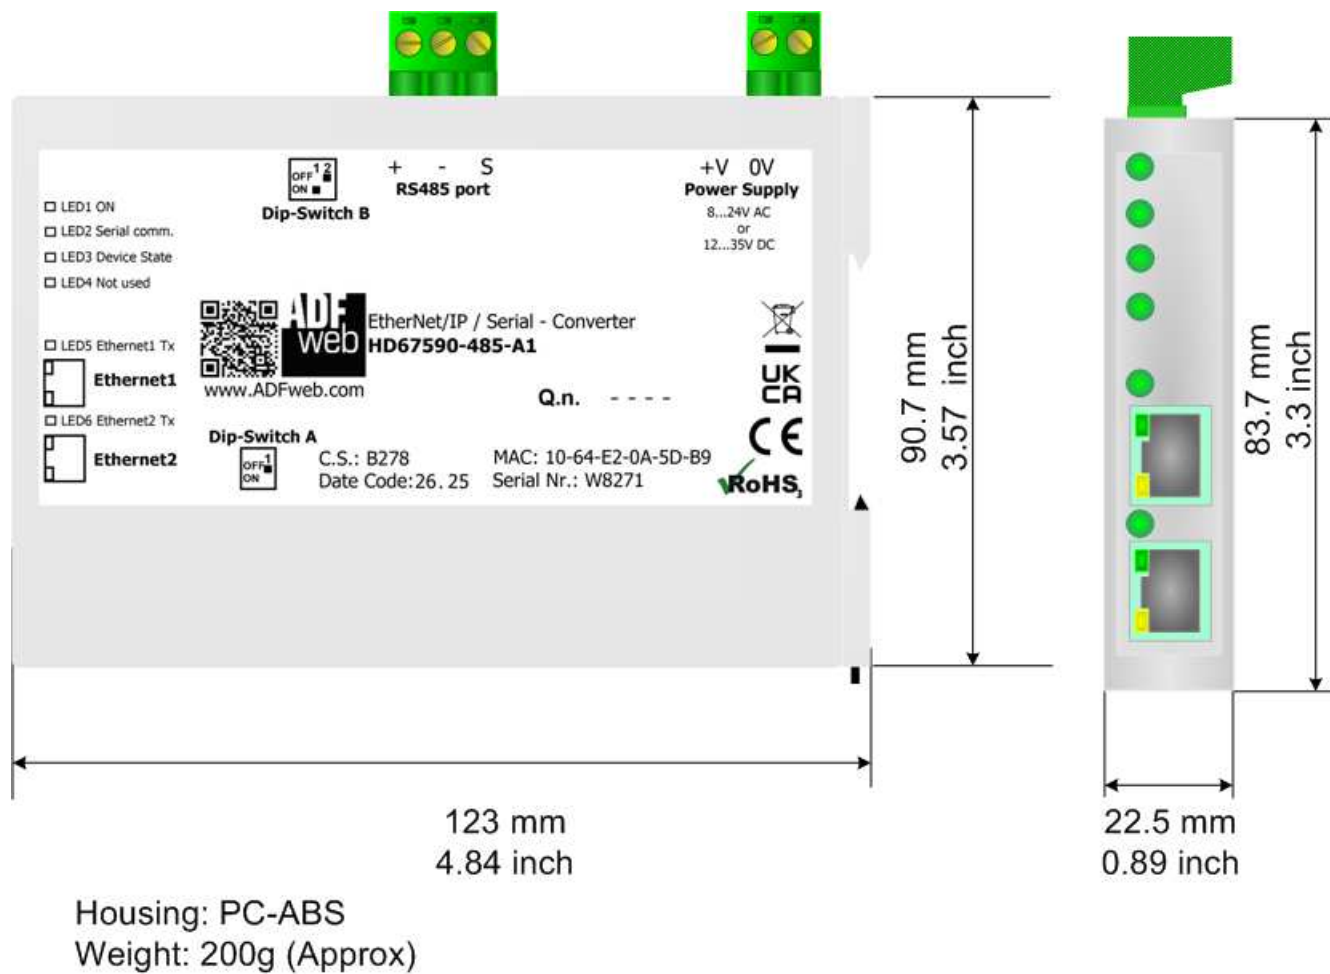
Mechanical dimensions scheme for HD67590-485-A1
